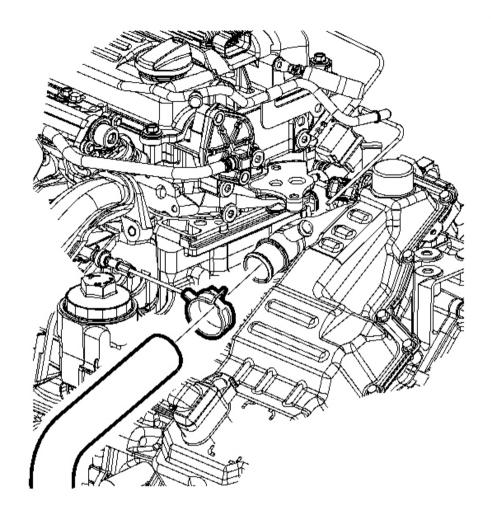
View Of Radiator Outlet Hose Clamp From The Engine Courtesy of GENERAL MOTORS CORP.
